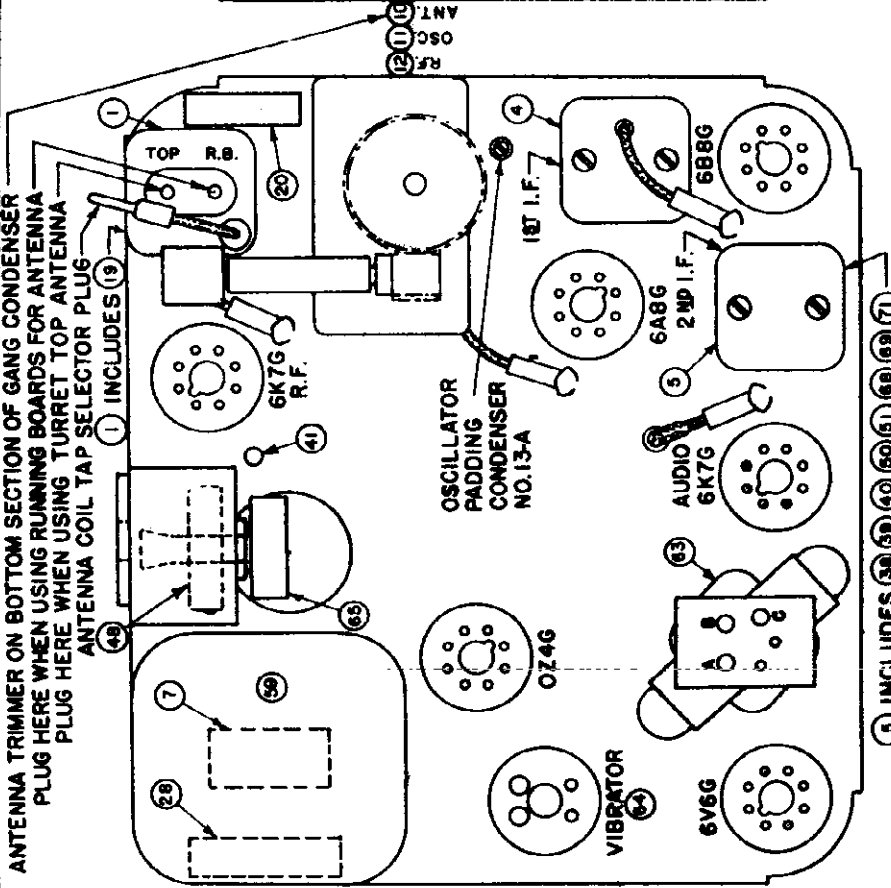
PARTS LAYOUT-BOTTOM VIEW
